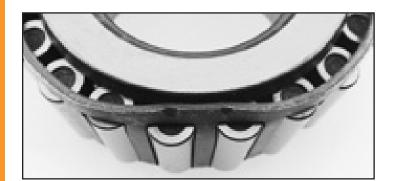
This cage deformation was caused by an improperly installed or dropped bearing.
